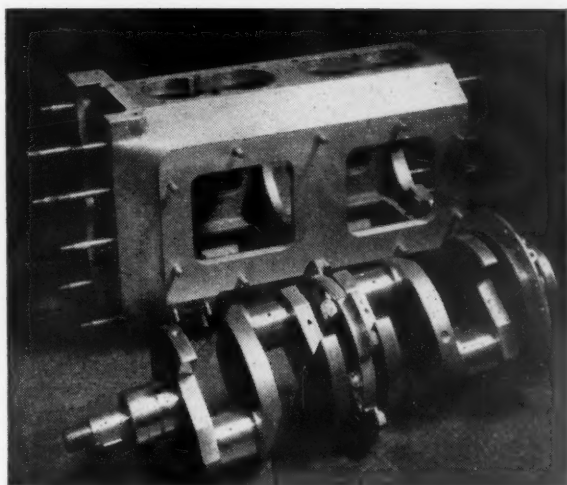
The crankshaft and main bearings removed from the crankcase. The mains are babbitt-lined bronze castings which bolt to the crankcase webs.
